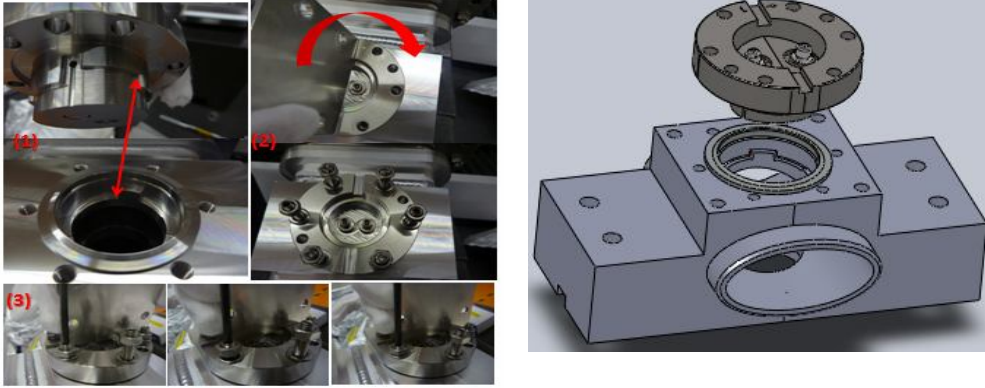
Steps to mount a flange into a BPM chamber (left); its related drawing (right)
